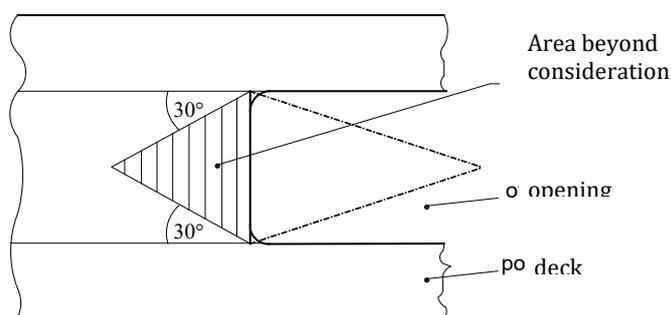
Principle of consideration of deck openings
